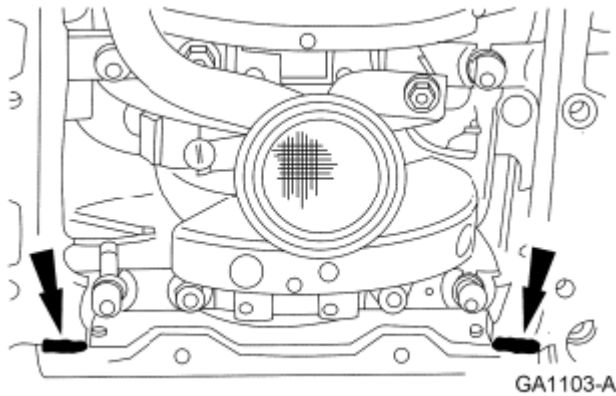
Locating Crankshaft Rear Seal Retainer Plate-To-Cylinder Block Sealing Surface
